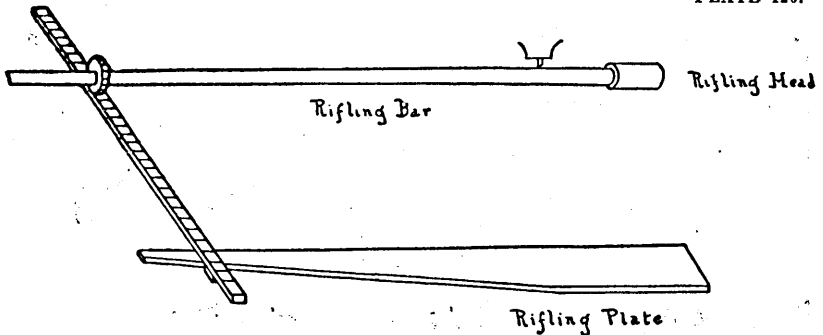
PLATE AND BAR MECHANISM FOR RIFLE GROOVE CUTTING.
